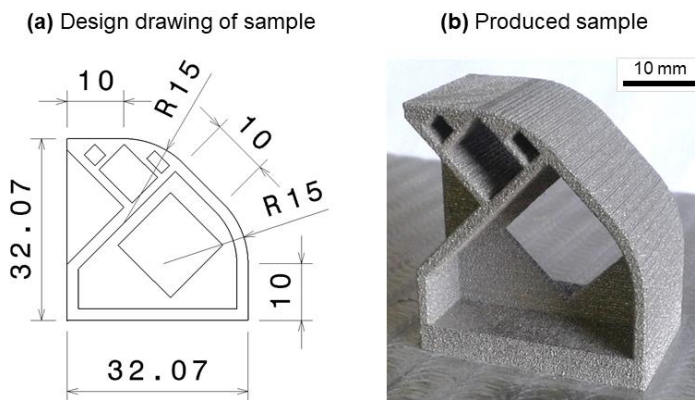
Workpiece used for experimental validation. (a) Workpiece design (b) Photograph of sample fabricated by Selective Laser Melting process
